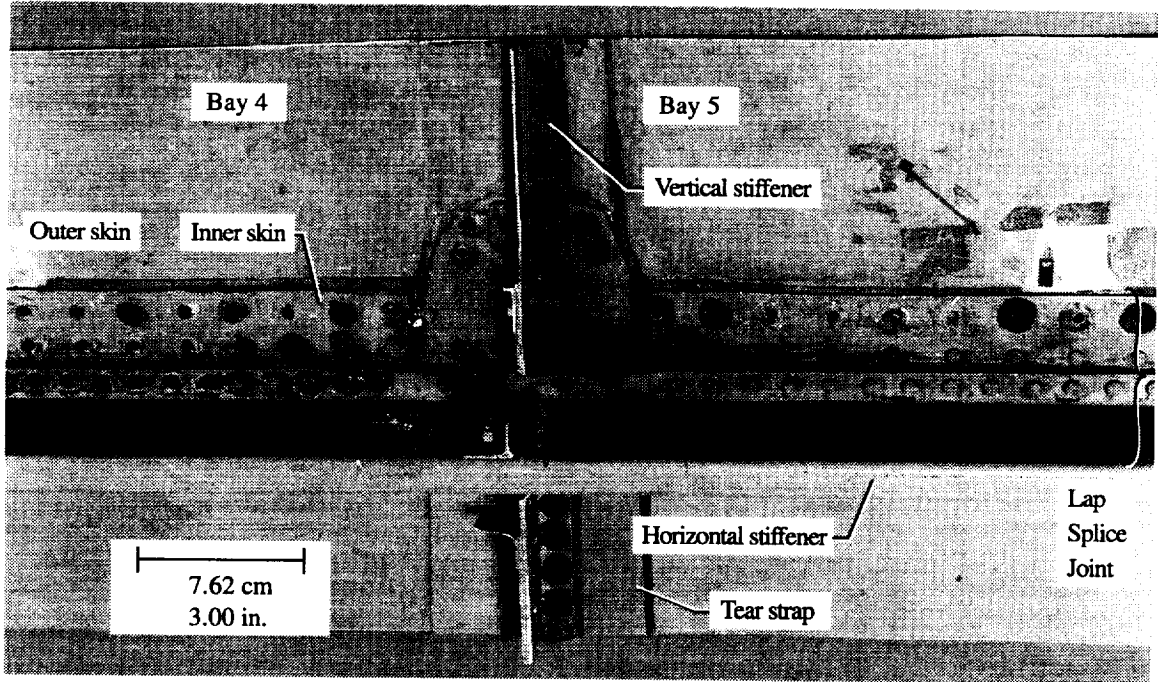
The photograph shows the inboard surface of the bay 4, bay 4/5 tear strap, and bay 5 regions. Structural features such as the tear strap, skin lap splice, vertical stiffener, and horizontal stiffener are all visible.
